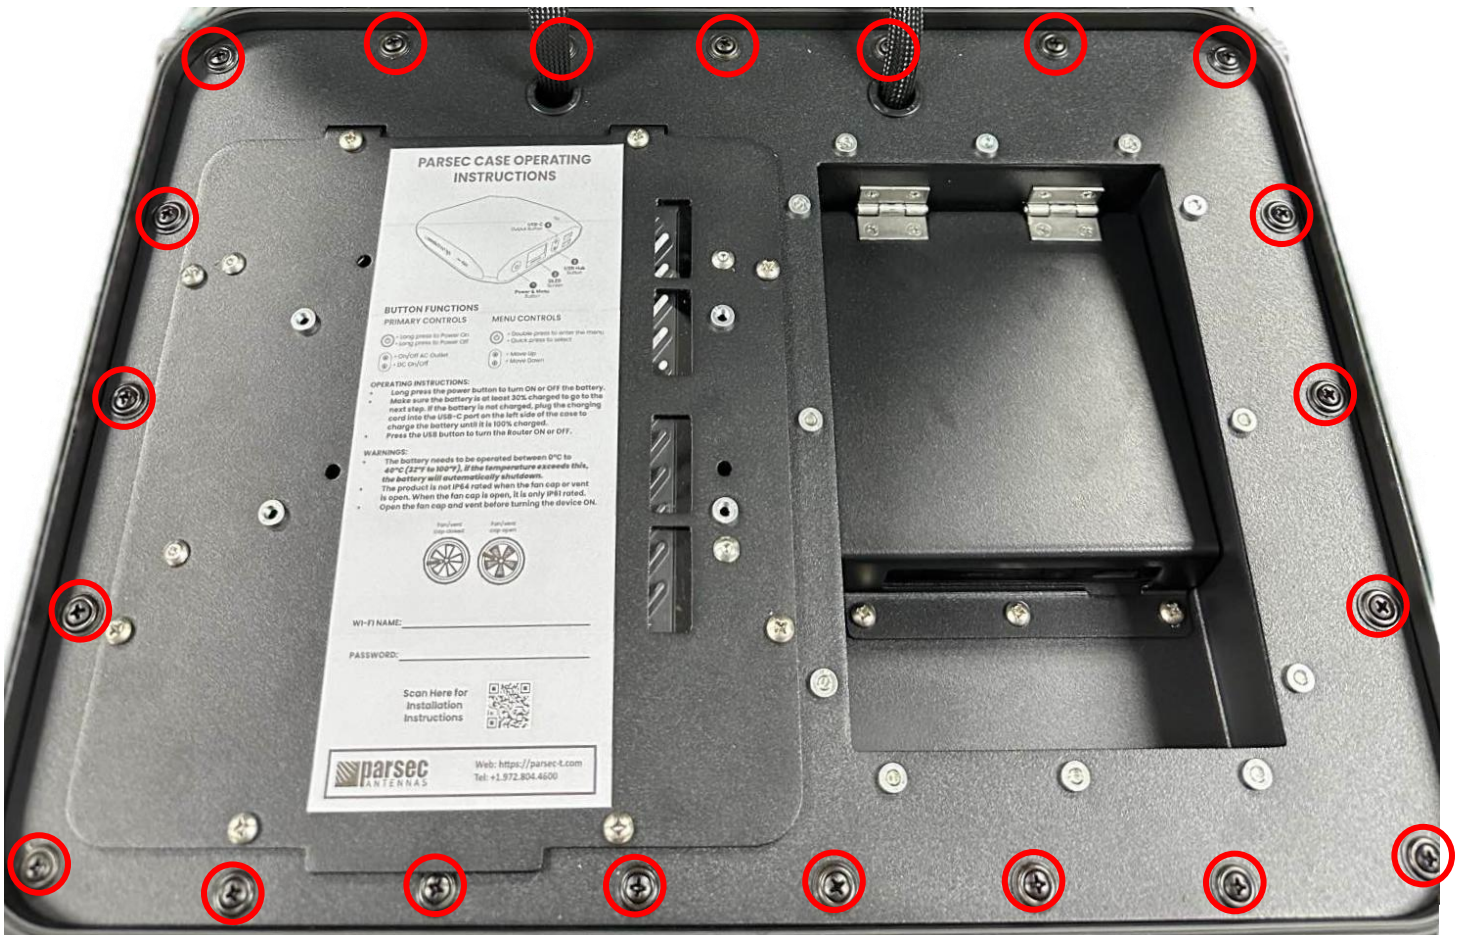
Fasten the cover plate to the case using PTA0351 screws.
